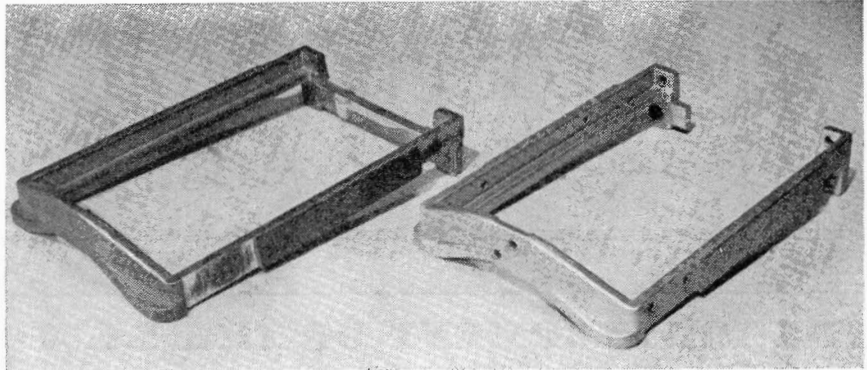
Frame Column. (a) Pressure Die Casting, (b) Machined and finished.
